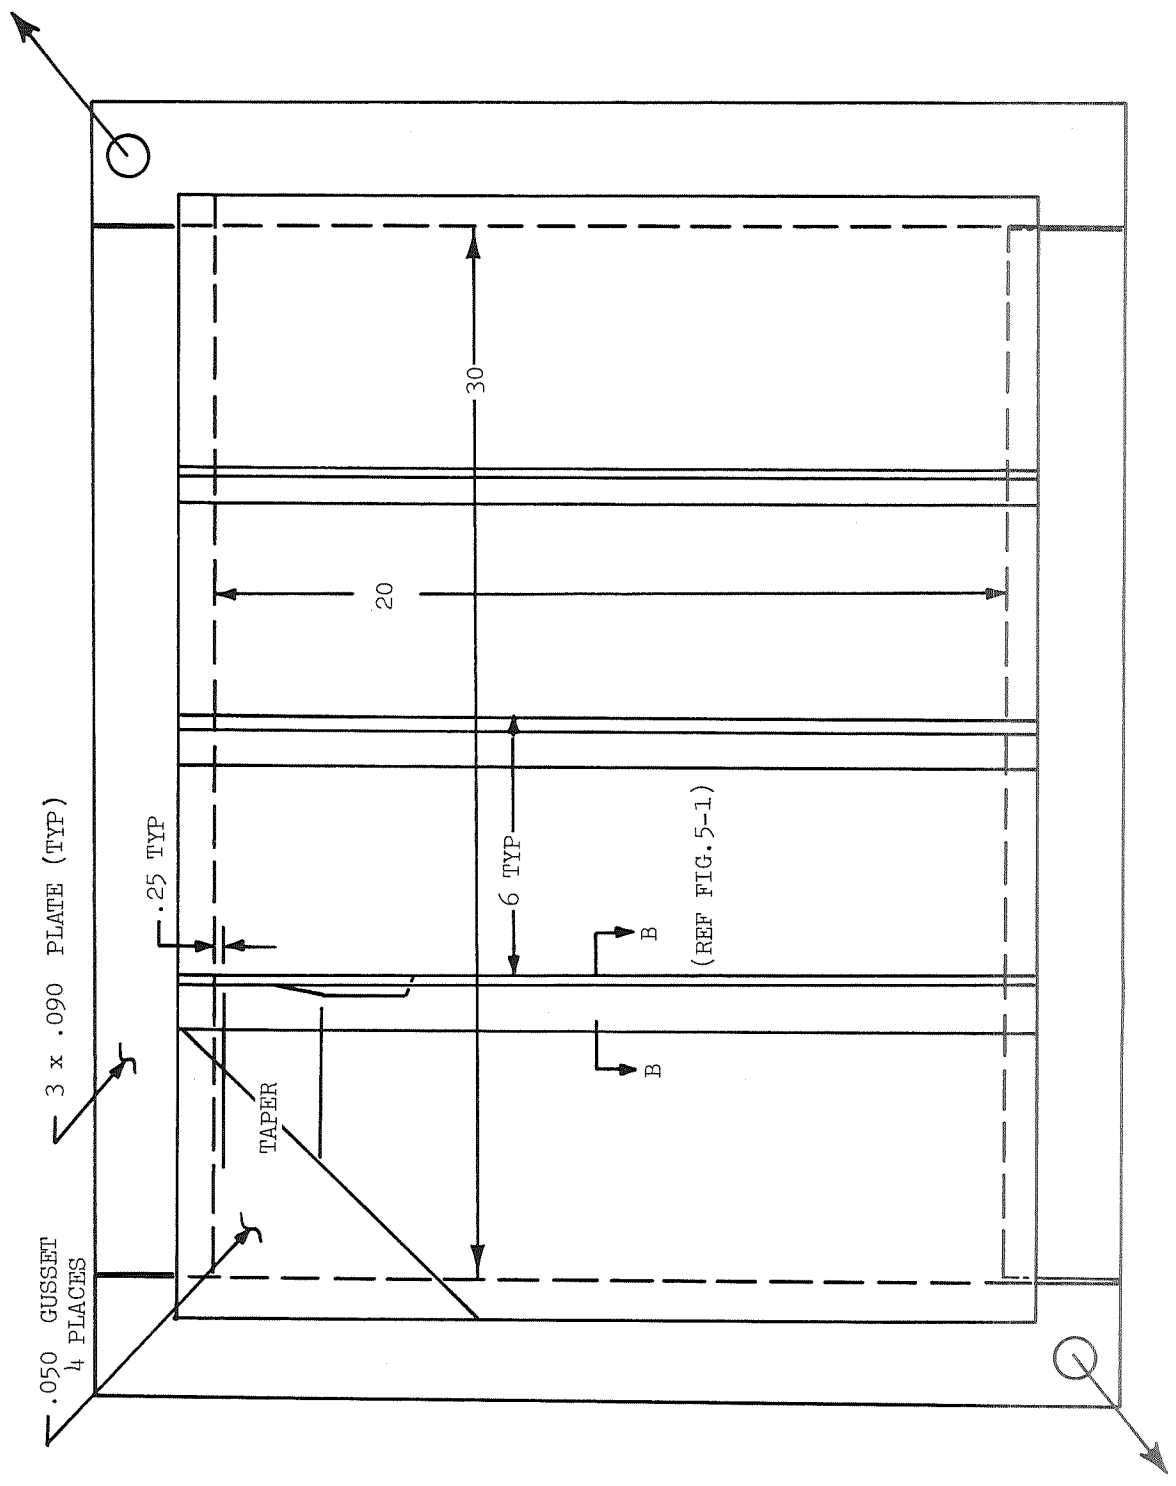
SHEAR TEST SPECIMEN GEOMETRY.
